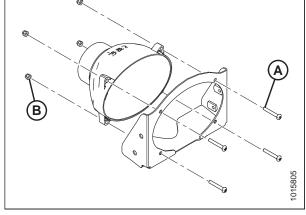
Right Side Headlight Shown – Left Side Similar
